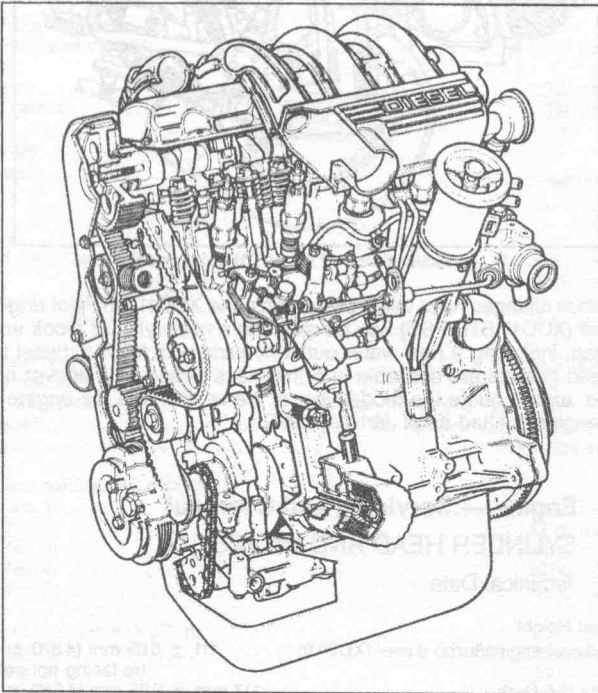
Sectional view of the assembled turbodiesel engine (XUD).
